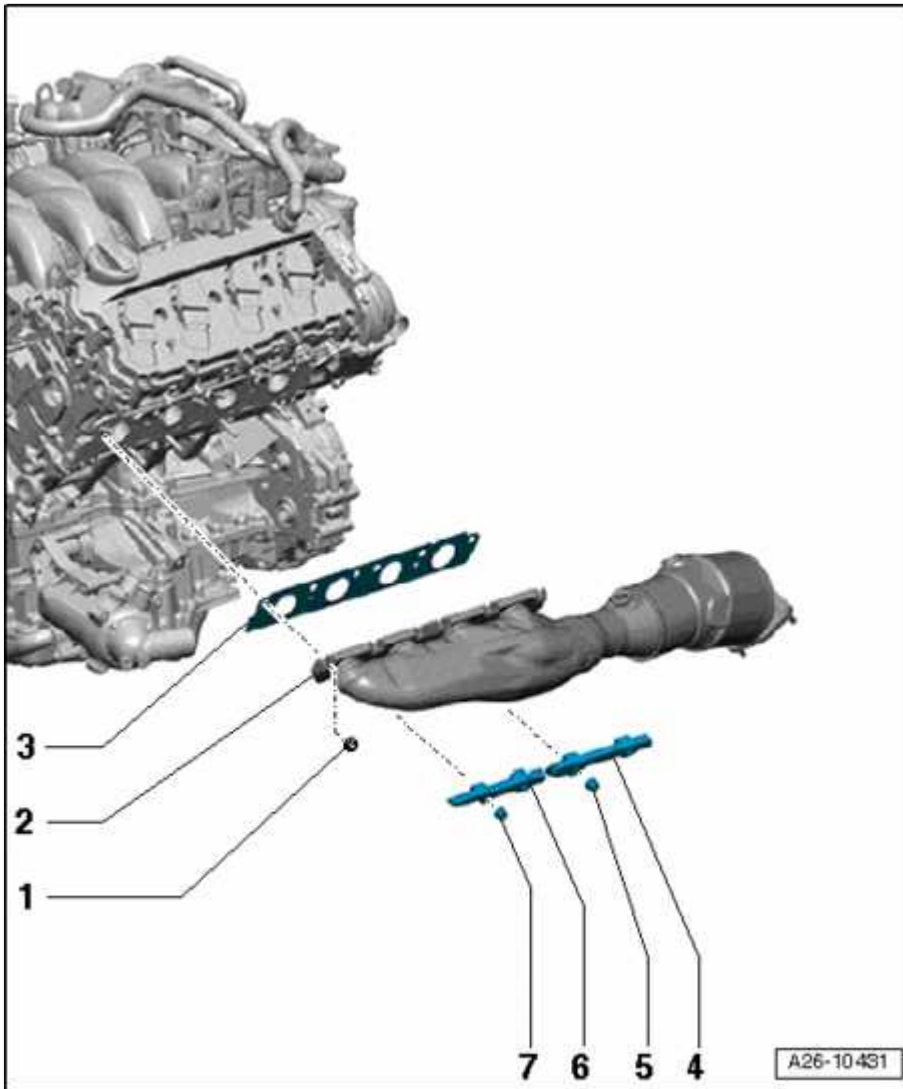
Identifying Special Tools - Exhaust Manifold, Assembly Overview
